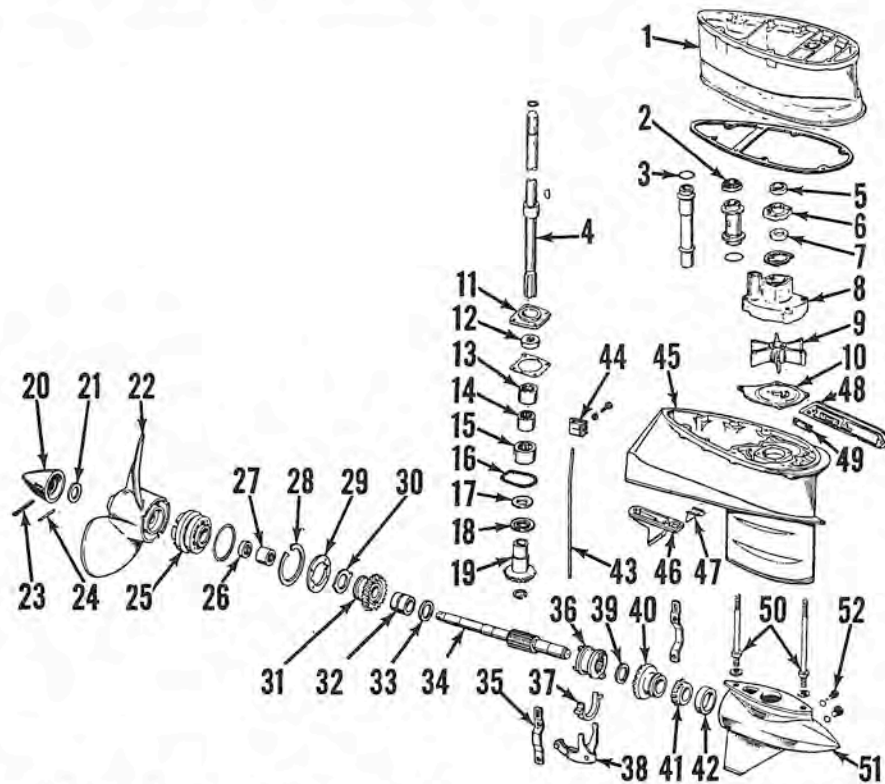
Exploded view of lower unit gearcase, water pump and associated parts used on 75 hp models. Items (1, 2 & 3) are used only on "Long" models.
